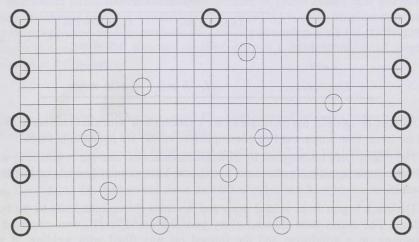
Layout of bank tubes plate in steam and water drums. Front of boiler; bold line shows welded rolled eyes
